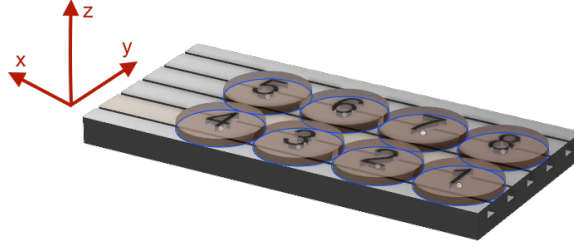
Sequence of the ball bar test on Dugard machine tool
